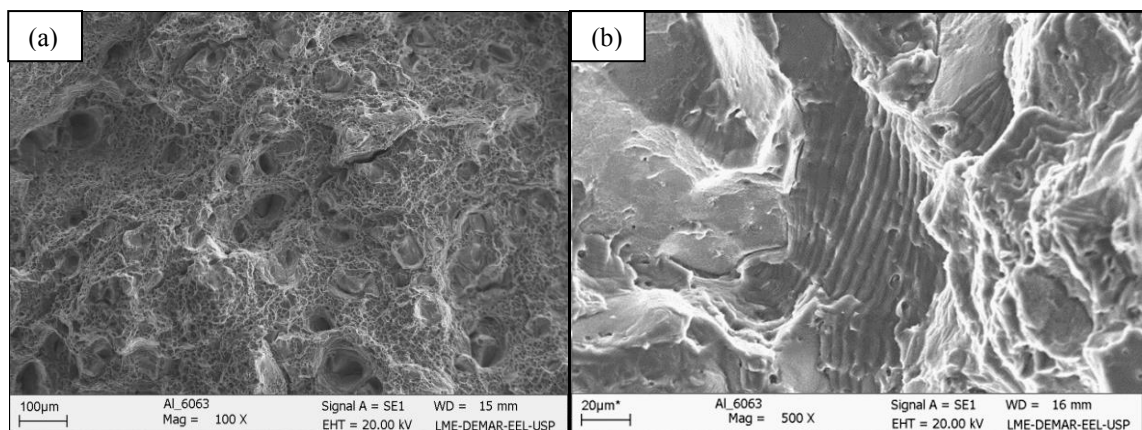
(a) Fractography of the AA 6063 alloy showing a surface rich of second phase particles (sample fractured in tensile test). (b) Fractography of the AA 6063 alloy tested at 177 MPa and fractured after 219,800 loading cycles.
